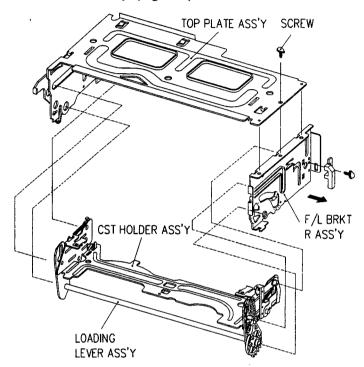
DISASSEMBLY OF THE FRONT LOADING ASS'Y
